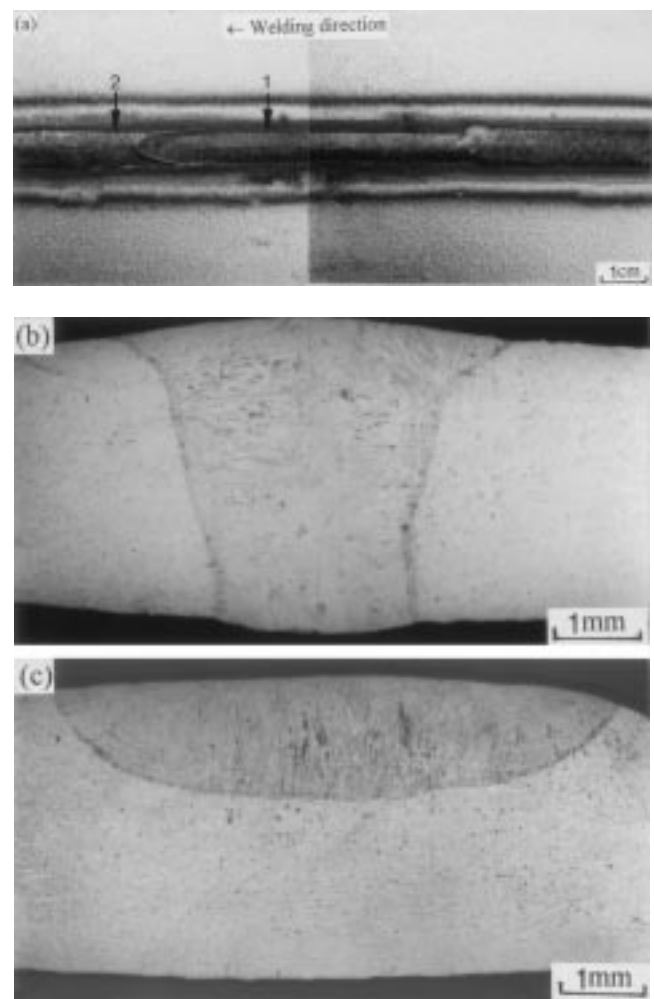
Cross-sectional views obtained by welding steels with different sulfur contents during TIG butt welding
